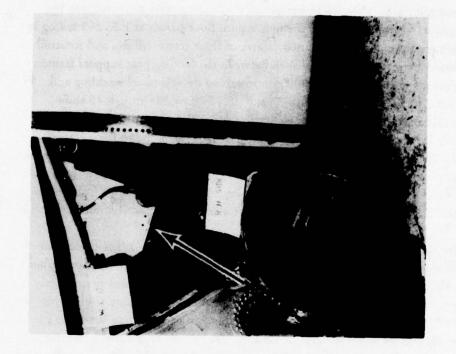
CH-47A Crash Test — Details of Failures in Right Main Landing Gear Support Structure Area.
